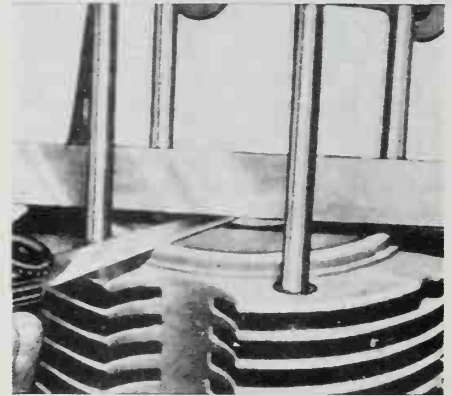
Measure piston height in cylinder and refer to text for cylinder head gasket thickness.
